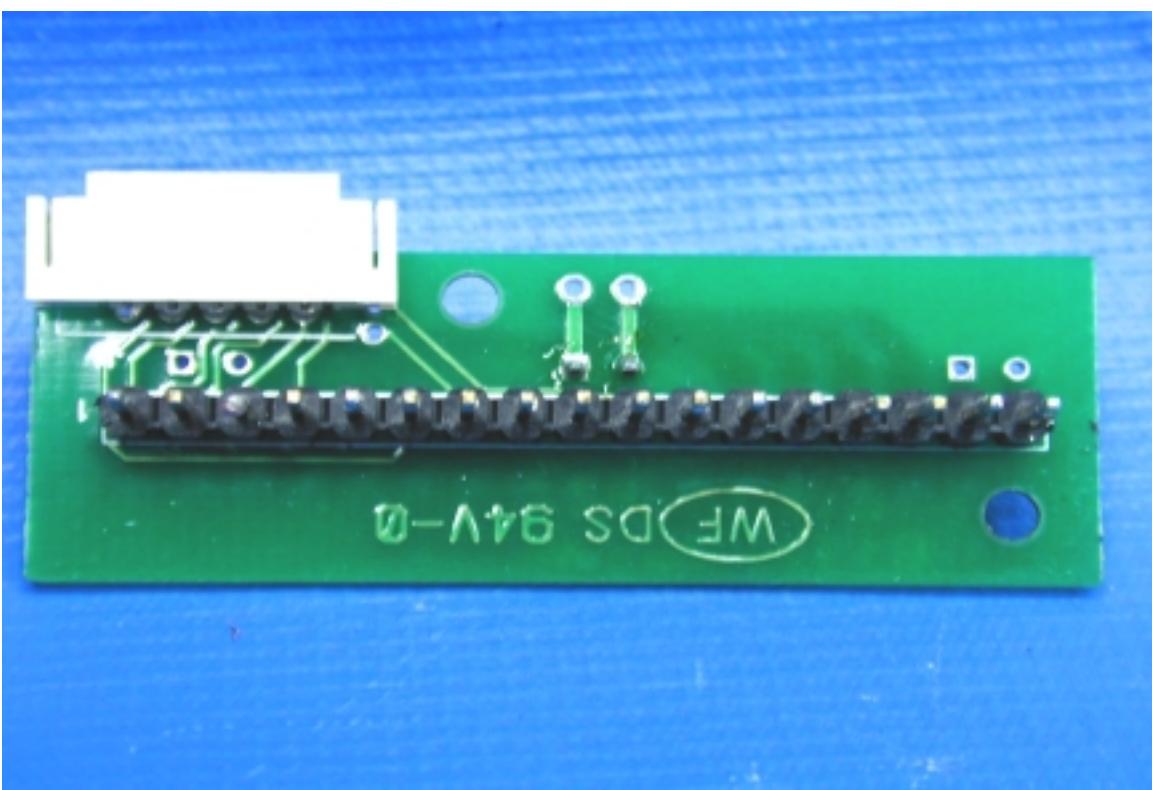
EUT (TX) SOLDERING SIDE VIEW
